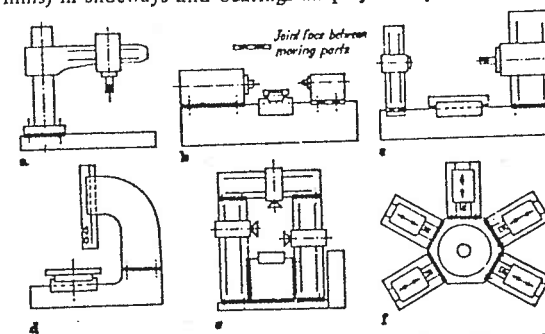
Examples of bolted joints in machine tool structures. a—Radial drilling machine; b—Centre lathe; c—Horizontal boring machine; d—Vertical slotting machine; e—Plano milling machine; f—Multi-spindle drilling units.
